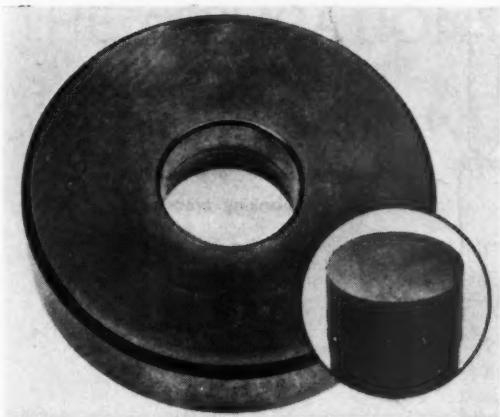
(a). Finish blanking technique developed at PERA. Radius edged finish blanking die with (inset) close fitting punch.
